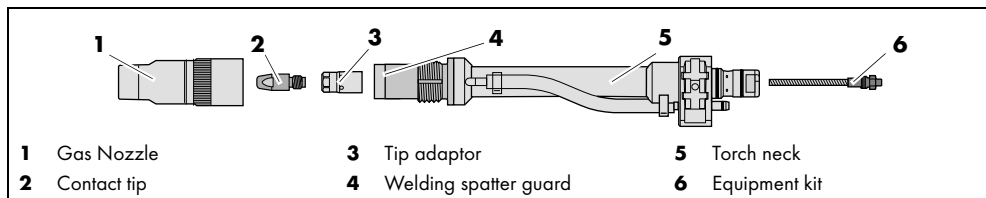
Equipping the ROBO WH 652D (TS)/WH W500 torch neck
